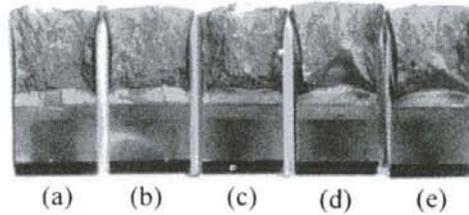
Macro-views of fractured specimens (a) F.L., (b) F.L.+1mm, (c) F.L.+3mm, (d) F.L.+5mm, and (e) F.L.+7mm .
